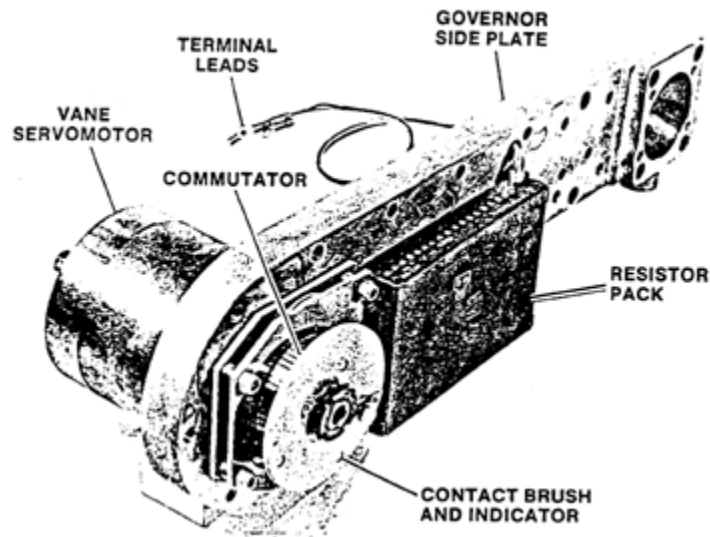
Integral Vane Servo and Resistor Assembly (cover removed)
